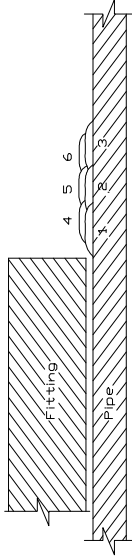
Suggest method of reducing gap between pipe and fitting before welding to fillet throat
